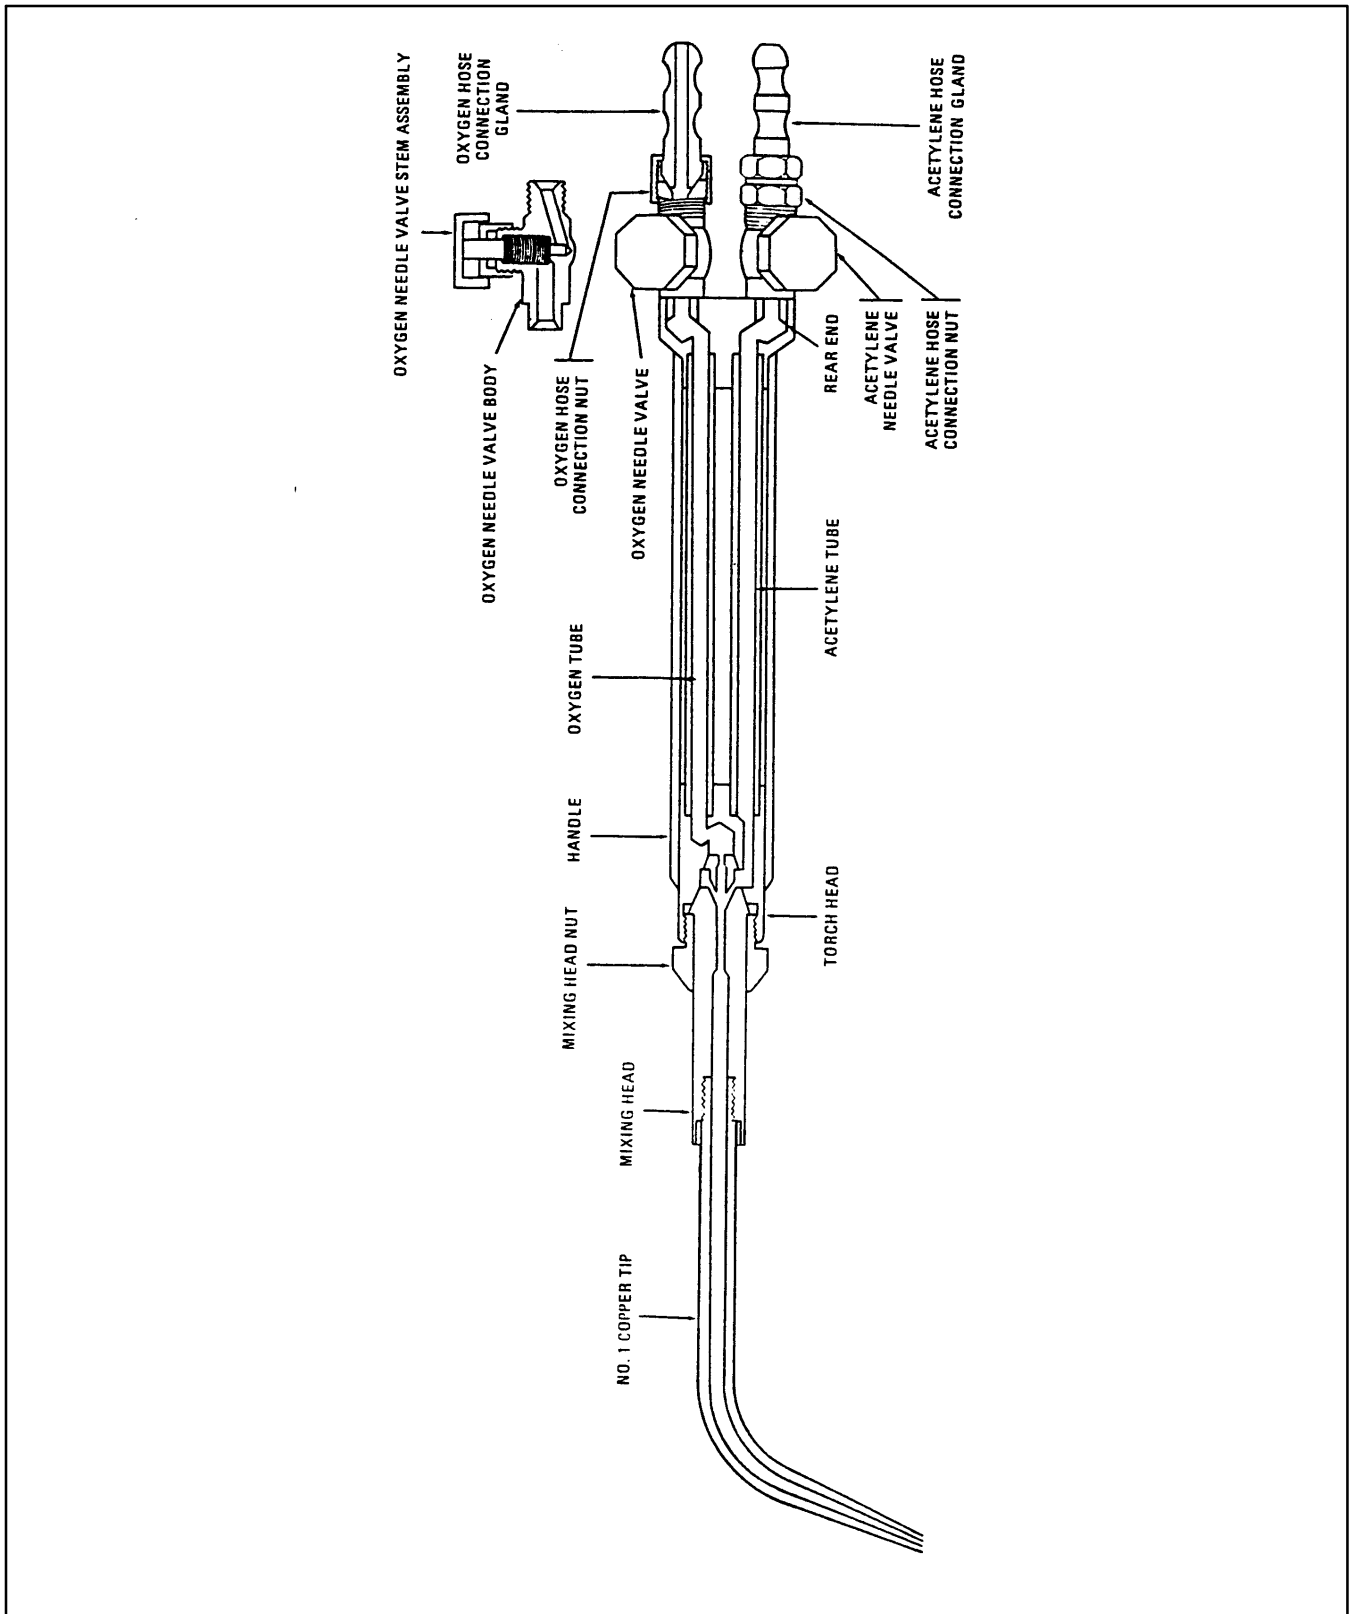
Equal Pressure Type, General Purpose Welding Torch
